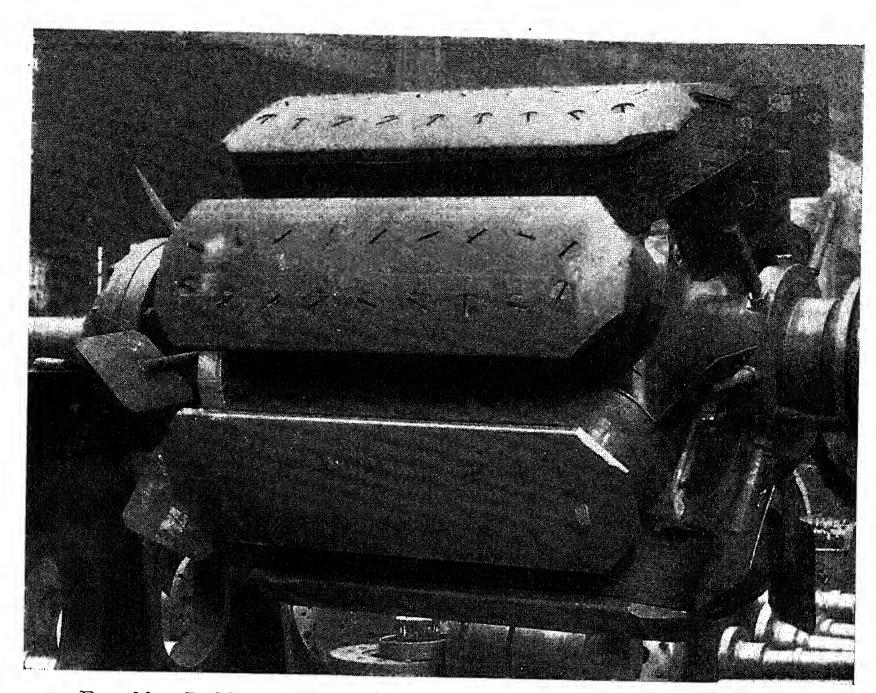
Paddle-wheel fans mounted on rotor of a synchronous motor.
